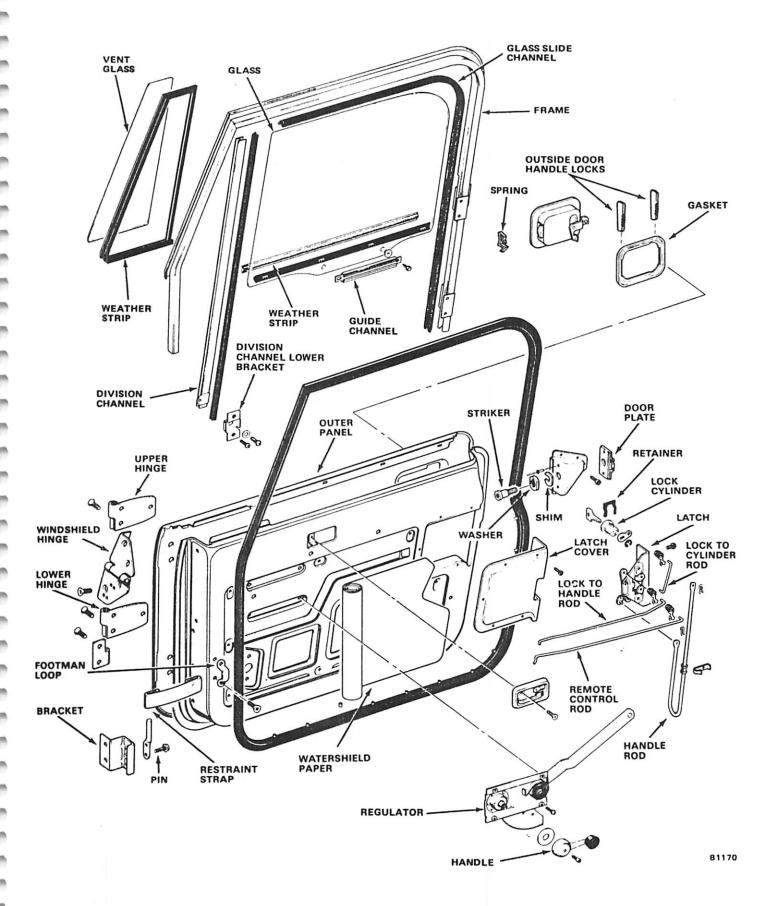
J-1 Front Door Exploded View—CJ and Scrambler Models
